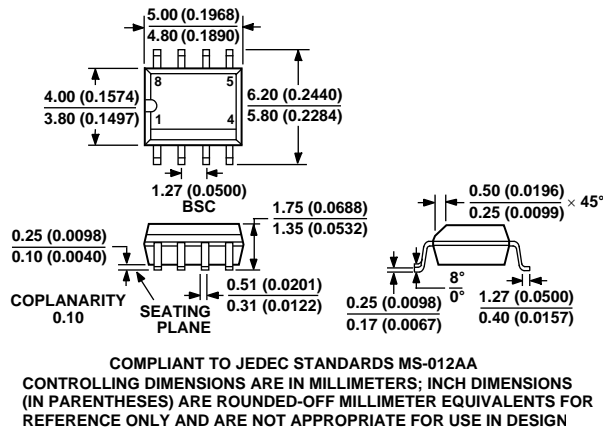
8-Lead Standard Small Outline Package Narrow Body [SOIC] (R-8)—Dimensions shown in millimeters and (inches)
